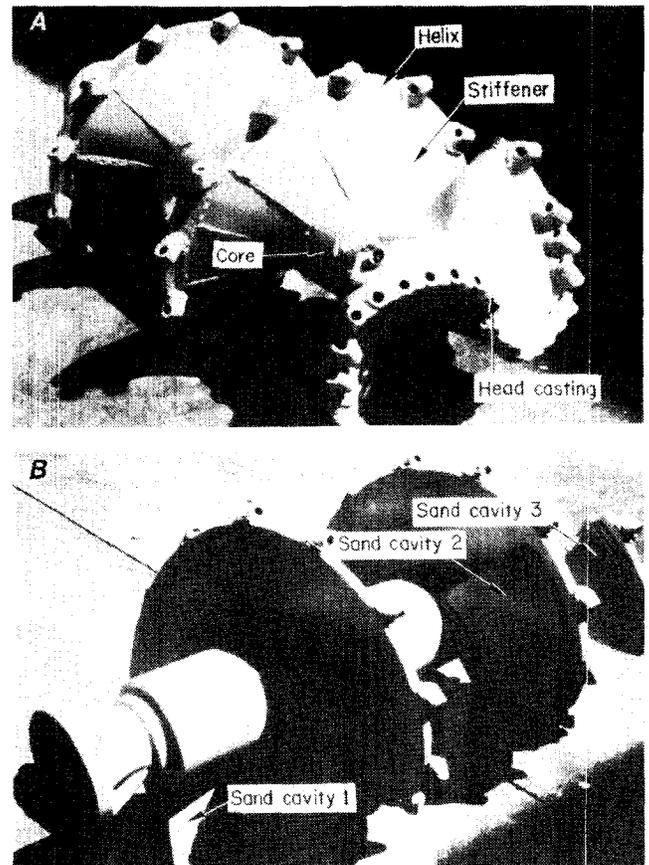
Sand-filled auger, conservative version. A, Nonconveying side of helix; B, conveying side of helix.
